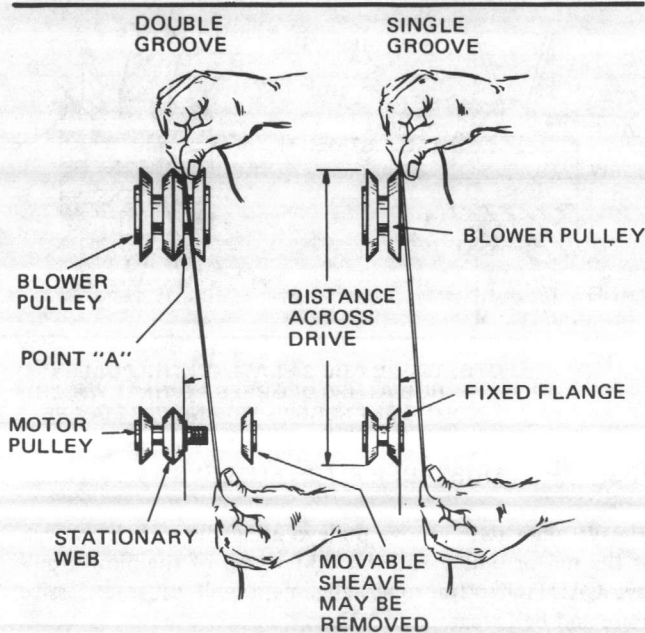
PULLEY ALIGNMENT WITH STRAIGHT EDGE
